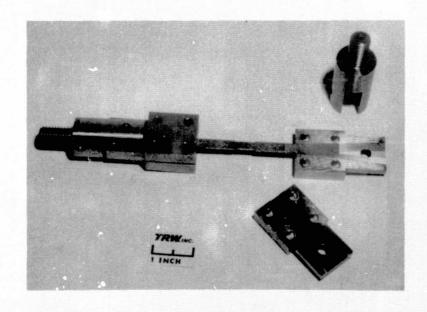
Stress Rupture Grip Assembly and Machined Specimen.
